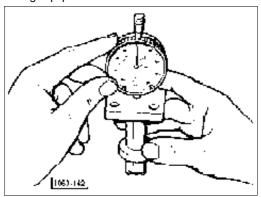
Resetting no. 5.9030.617.4 /10 comparator-equipped tool.
